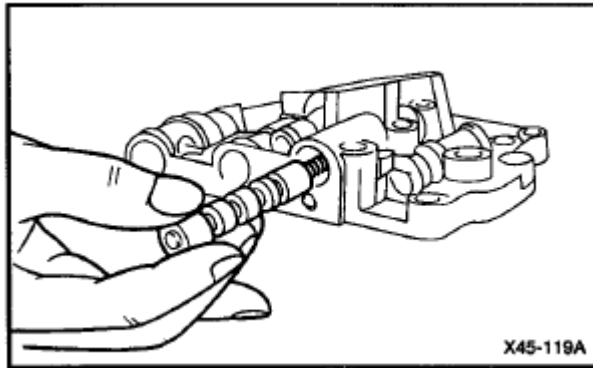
Removing Damper Clutch Control Sleeve, Valve, Spring, & Fail Safe Valve
